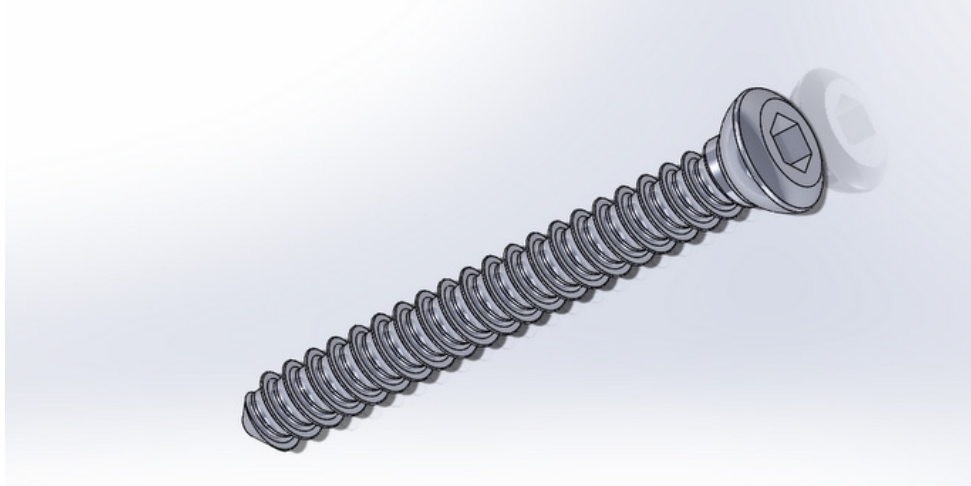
CAD model of designed 3.5 mm cortical screw
